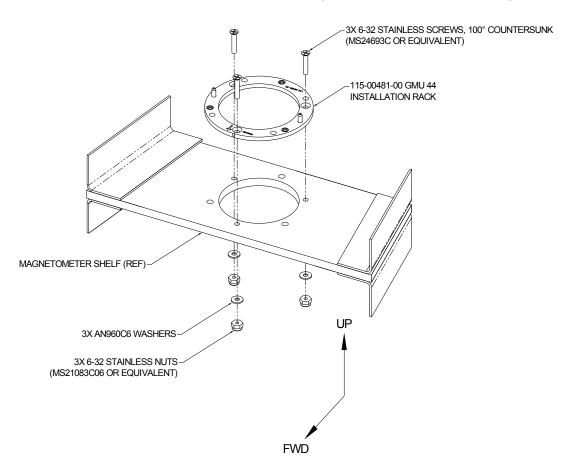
Assembly Of GMU 44 Installation Rack To Magnetometer Shelf
